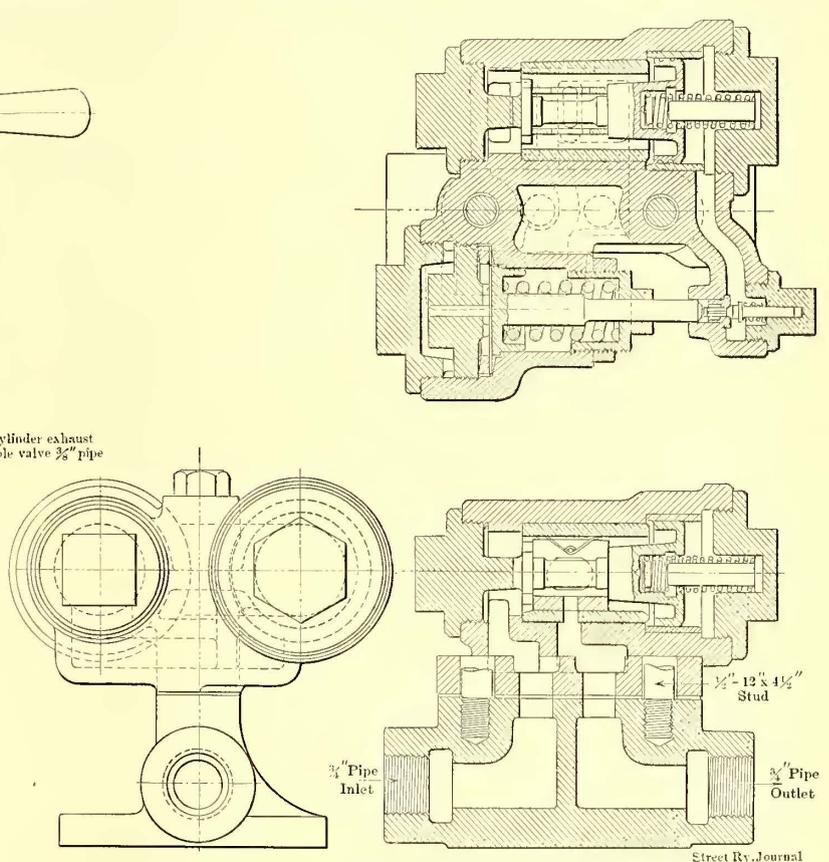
DETAILS OF REDUCING VALVE FOR SURFACE TRACTION AIR BRAKE SYSTEM
